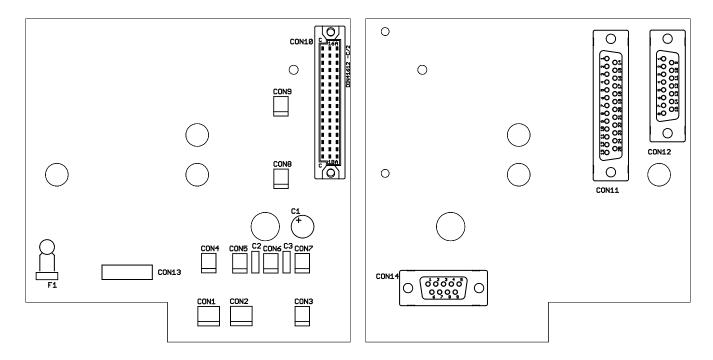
Terminal Diagram PCB Applicator Interfaces A 1000 (5949104.001)
